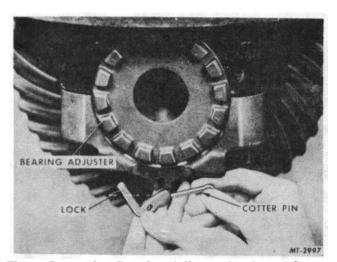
Removing Bearing Adjuster Lock and Cotter Pin.
